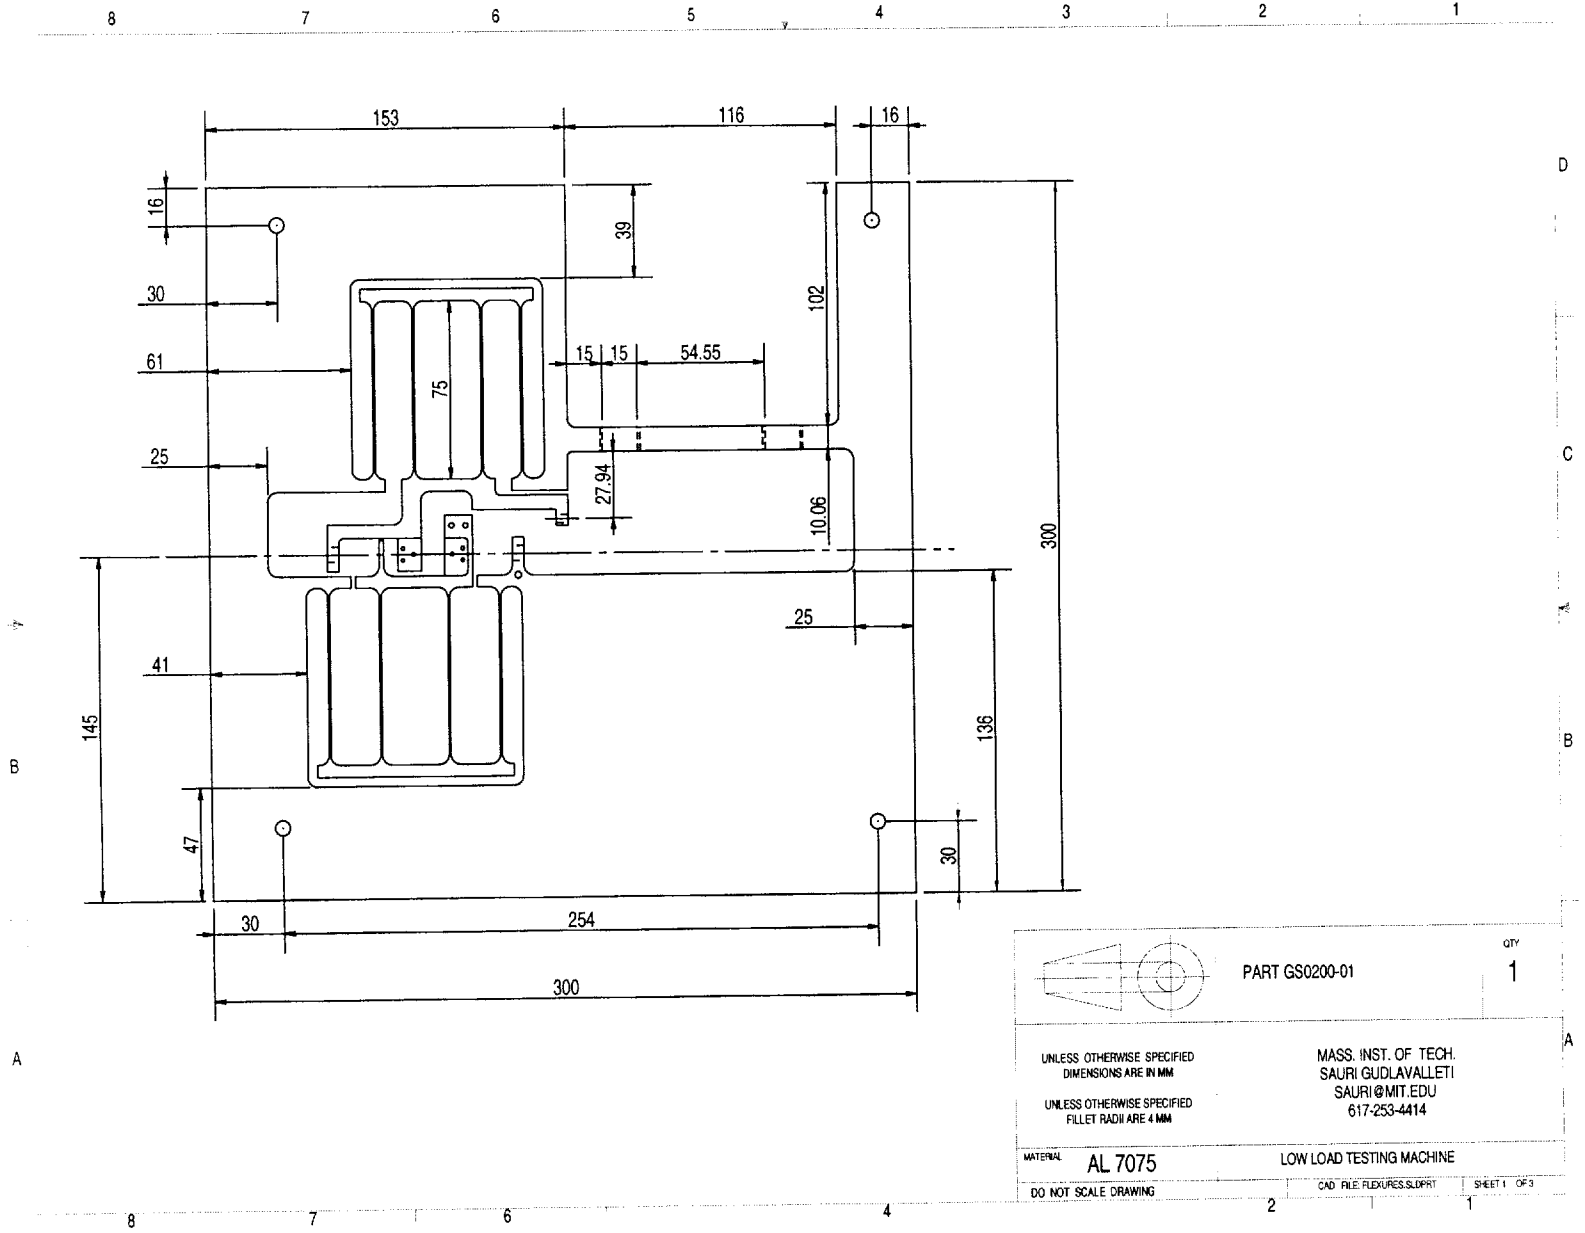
Part GS 0200-01. Low load testing machine flexure frame (Sheet 1 of 3)
